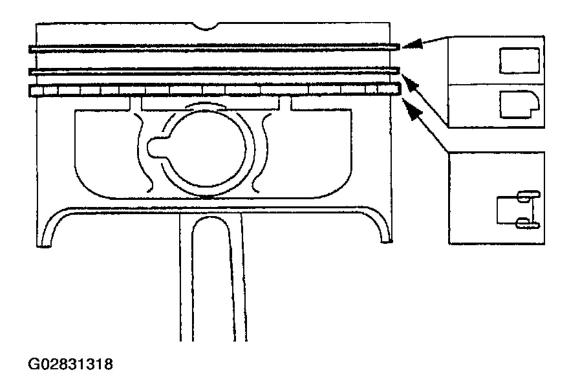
Installing Piston Rings Courtesy of MAZDA MOTORS CORP.
